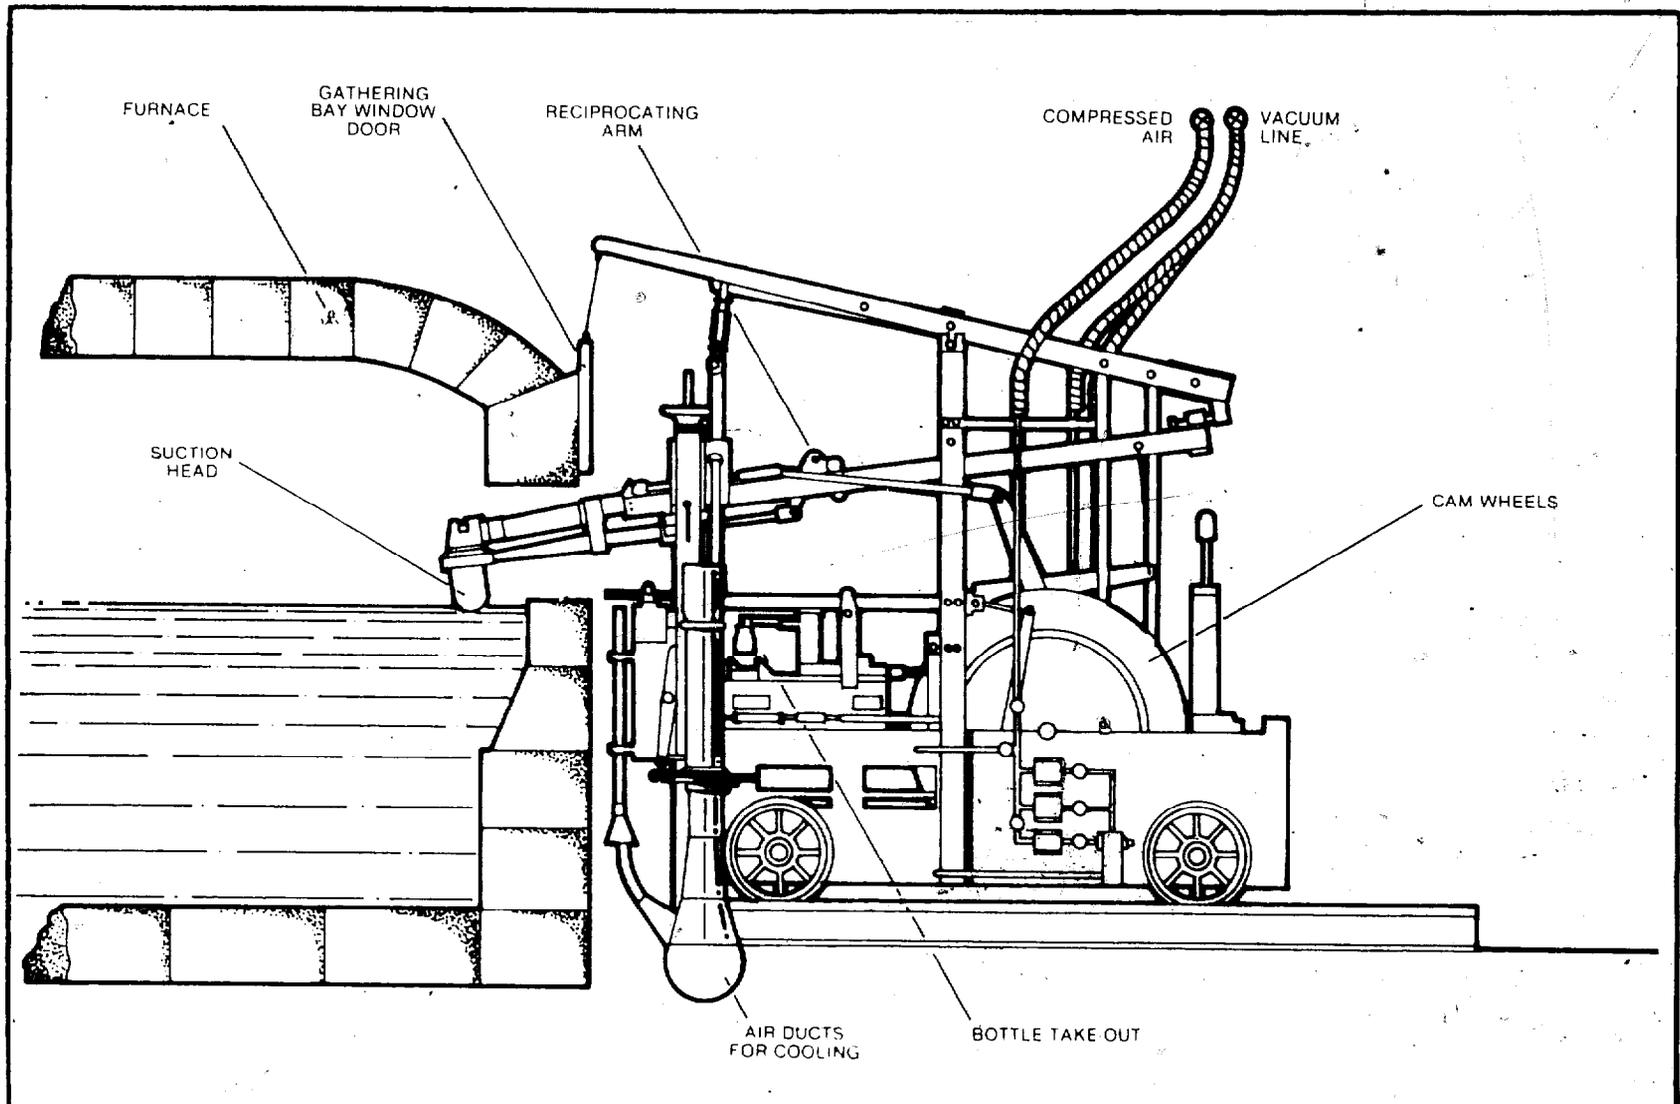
Drawing of the Type 'F' suction moulding machine for producing good quality bottles.
